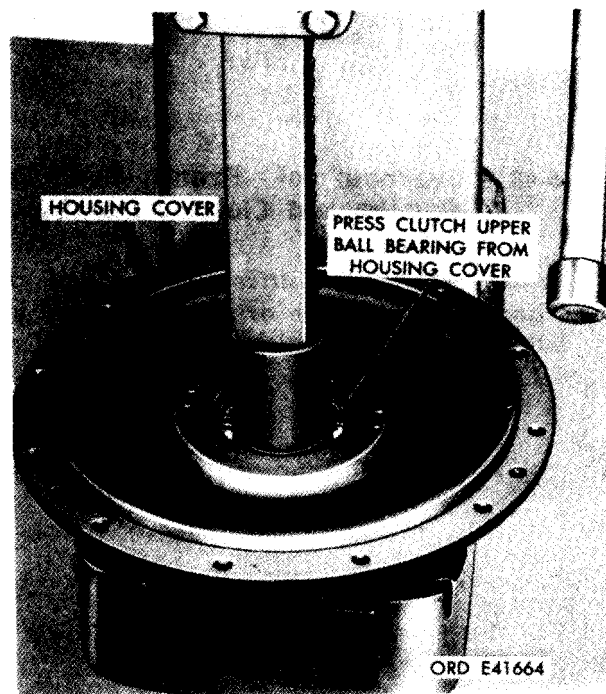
Remove fan drive clutch upper ball bearing from housing cover.
